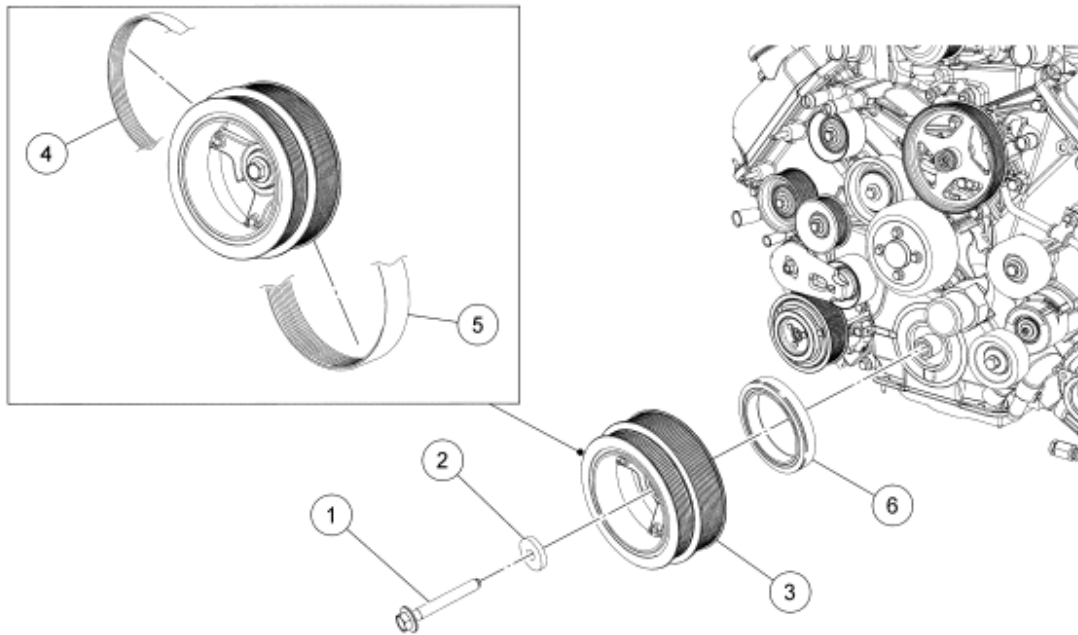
Exploded View Of Crankshaft Pulley & Crankshaft Front Seal - Lower End Components
